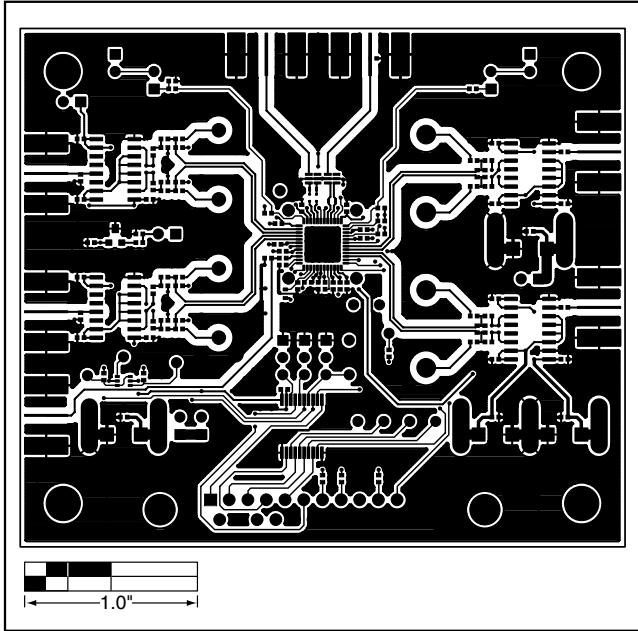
MAX2820/MAX2821 EV Kits PC Board Layout—Component Side
